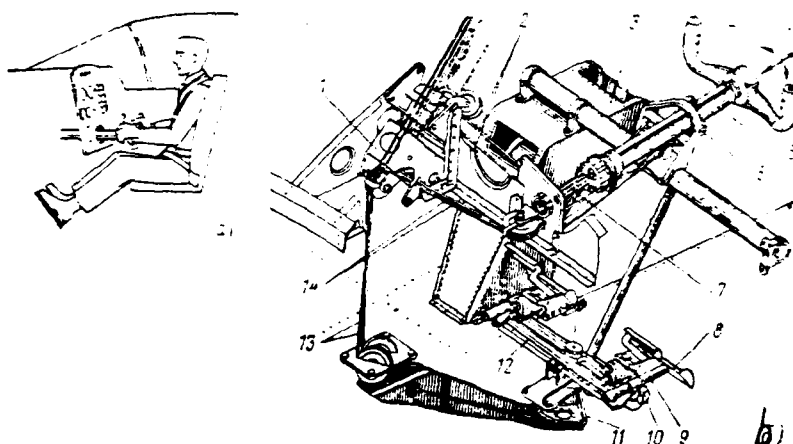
Installation of handwheel on shaft, passing through instrument panel of pilot: a) general view of installation; b) construction/design of installation of light aircraft with cable control: 1 - bracket with rollers, 2 - control cables of ailerons; 3 - central control panel (throttle controls are not conditionally shown); 4 - handwheel; 5 - tubular shaft of handwheel; 6 - rollers; 7 - shaft guide during pitch control (it is established/installed in bearings and simultaneously it serves for transmission of rotation of handwheel during roll control); 8 - control pedal of rudder; 9 -
